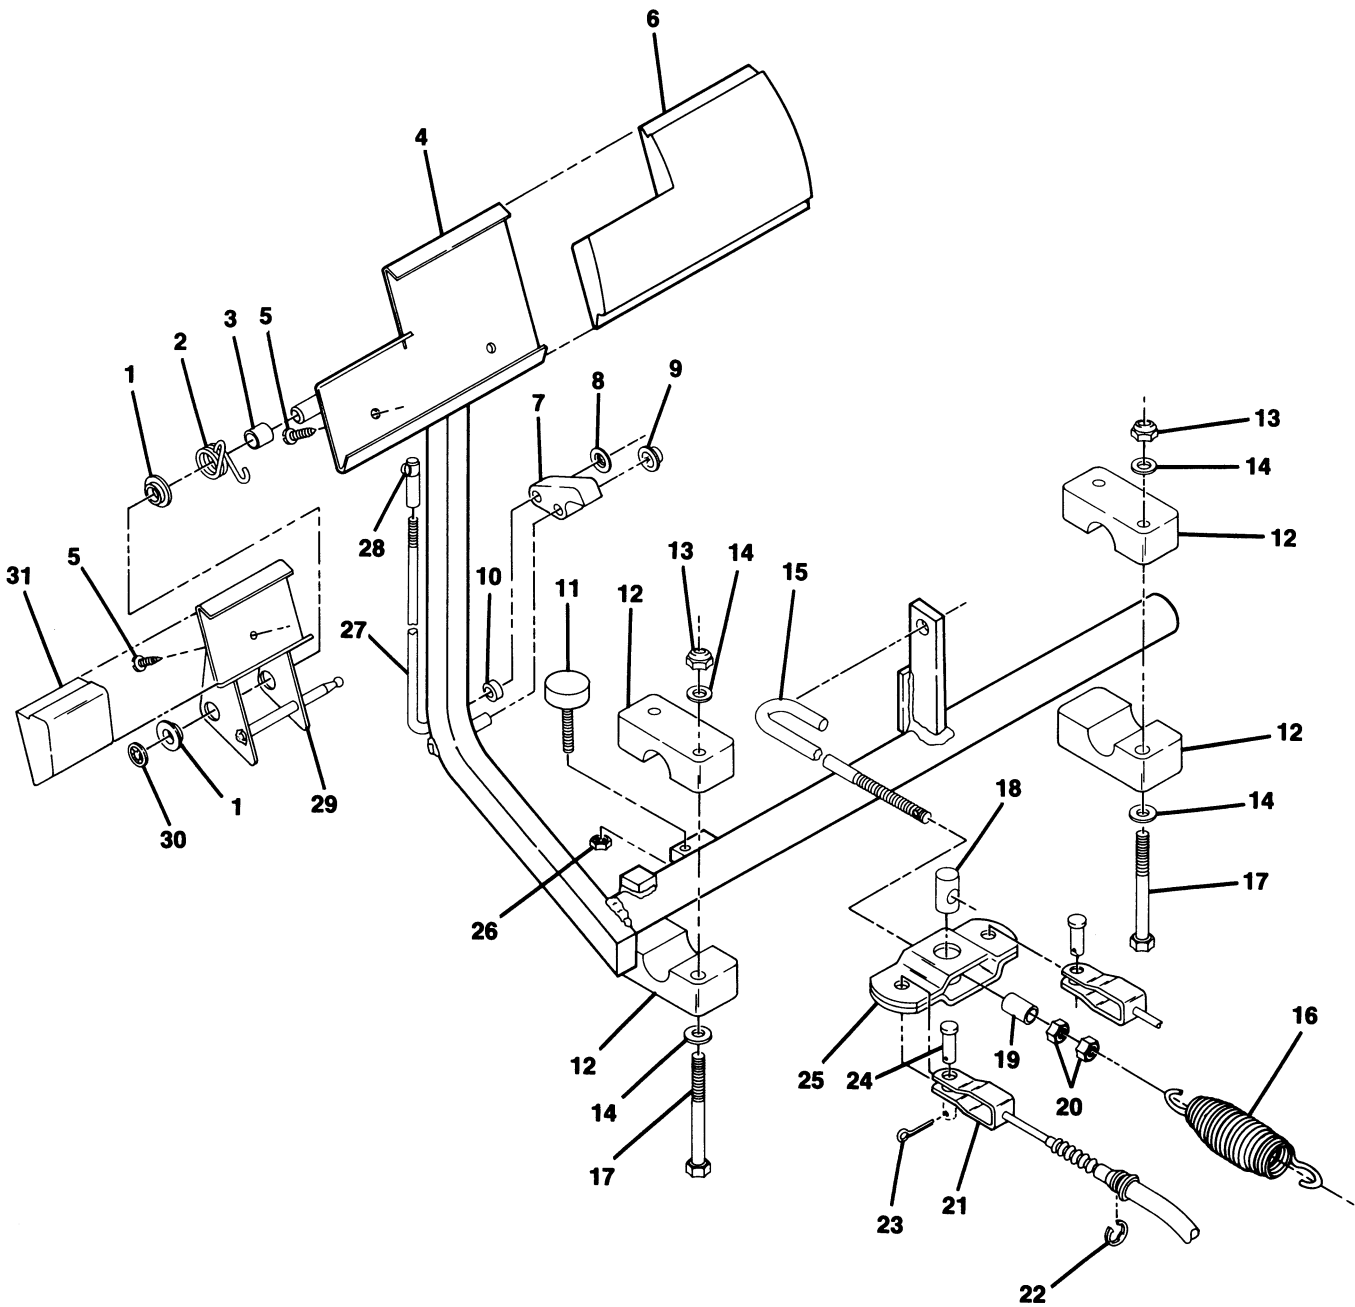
BRAKE PEDAL AND CABLE ASSEMBLY. SEE LIST 4-2.
